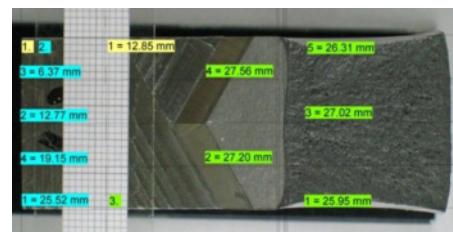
Digital measurement of a CT test specimen (fracture surface)
